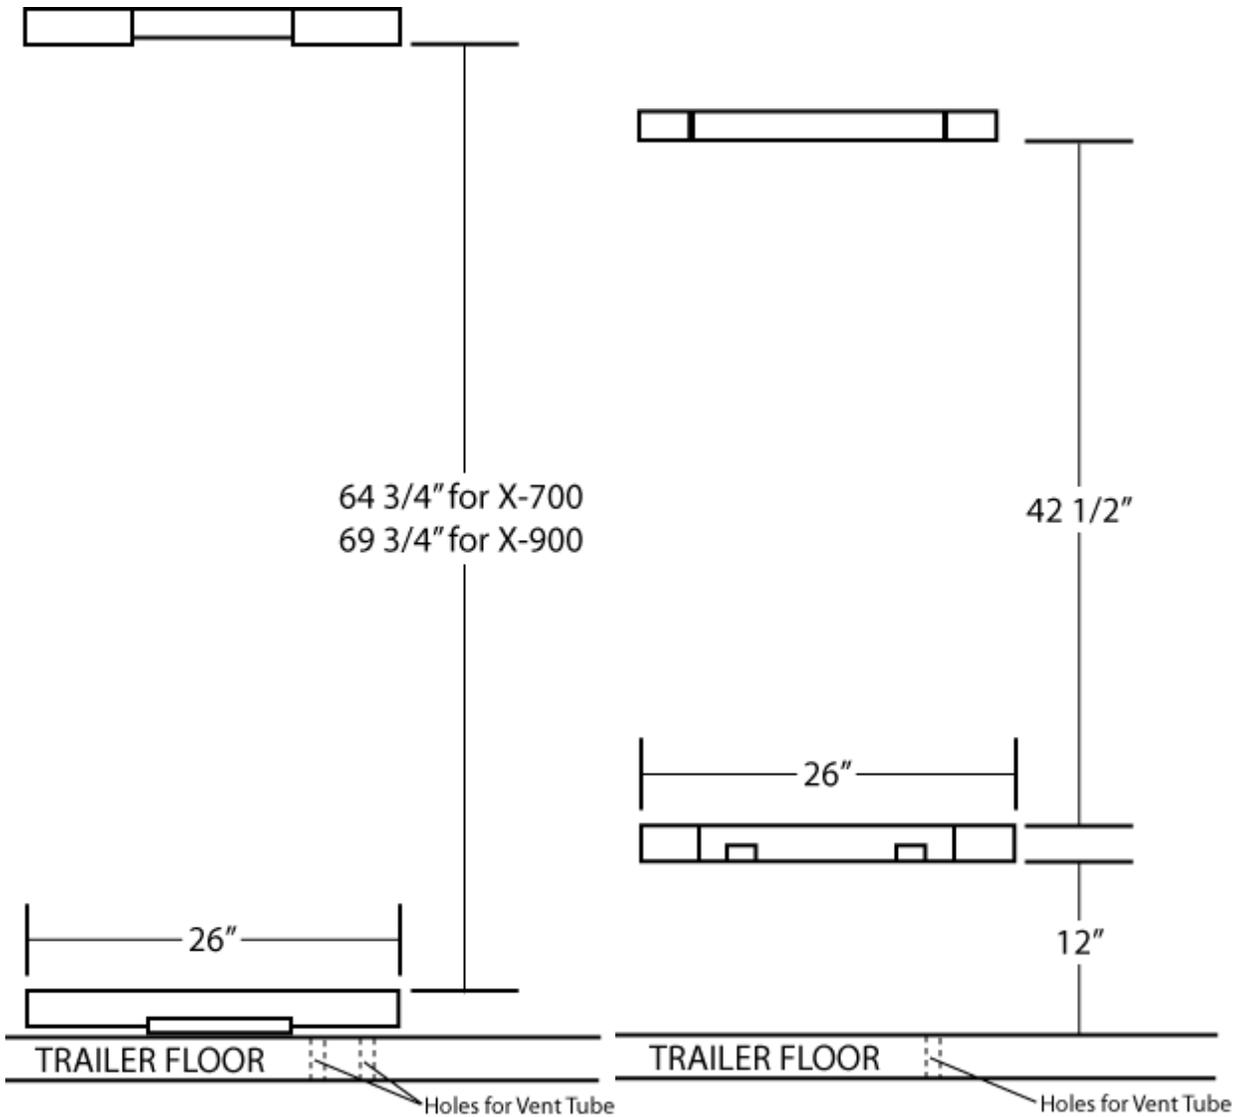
Location of Wall Brackets for X-700 and X-900 (Left) Location of Wall Brackets for 118T (Right)
